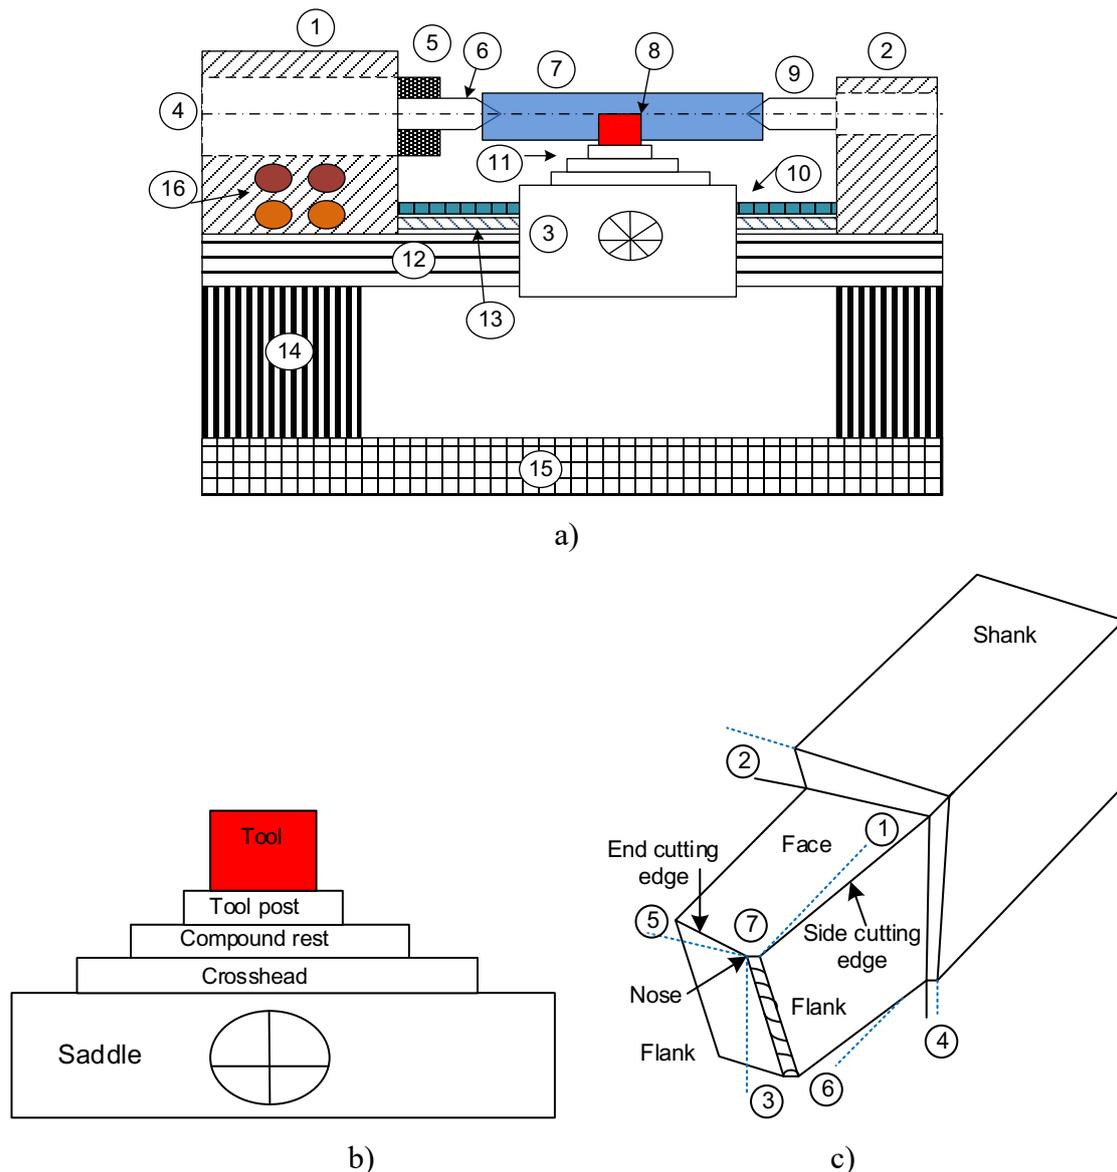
Schematic diagram showing a) lathe machine with major components, b) closure look of carriage with multiple parts and c) single point cutting tool. Parts details are 1, headstock, 2 tail stock, 3 carriage, 4 spindle axis, 5 chuck, 6 live-centre, 7 workpiece, 8 cutting tool, 9 dead centre, 10 leadscrew, 11 compound rest, 12 structural member, 13 feed rod, 14 structural member, 15 base, 16 control panel
